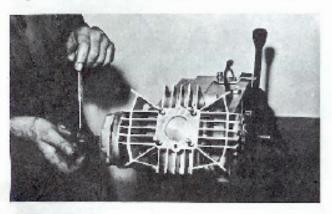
Using a socket, loosen and remove the crankshaft nut. Remove the pulley which the releases the clutch plates.
